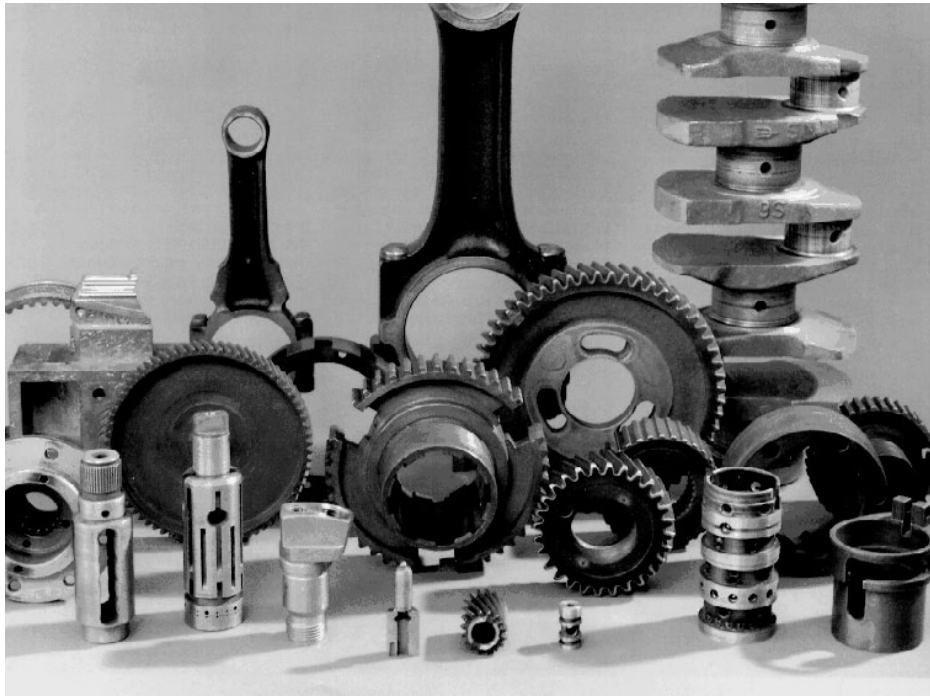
Examples of parts, on which electrochemical deburring is produced (AEG-Elotherm).
